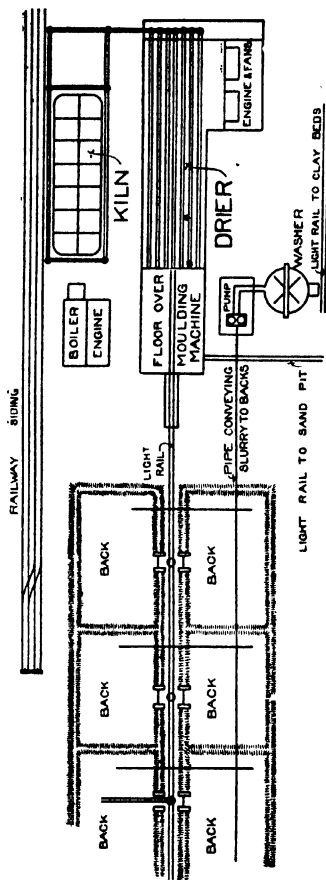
Plan of washing plant in brickworks (Middleton).
